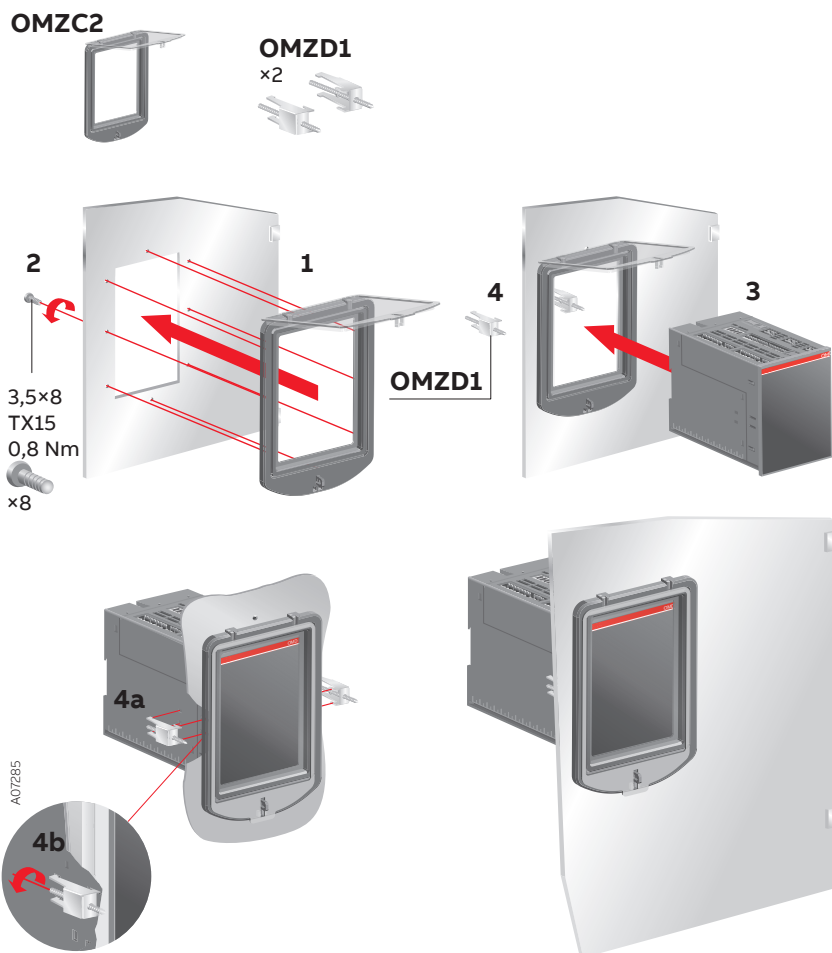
Automatic control unit OMD200 and 300, door mounting with the cover plate, door drilling for the cover plate OMZC2, see Accessories, Section 10
